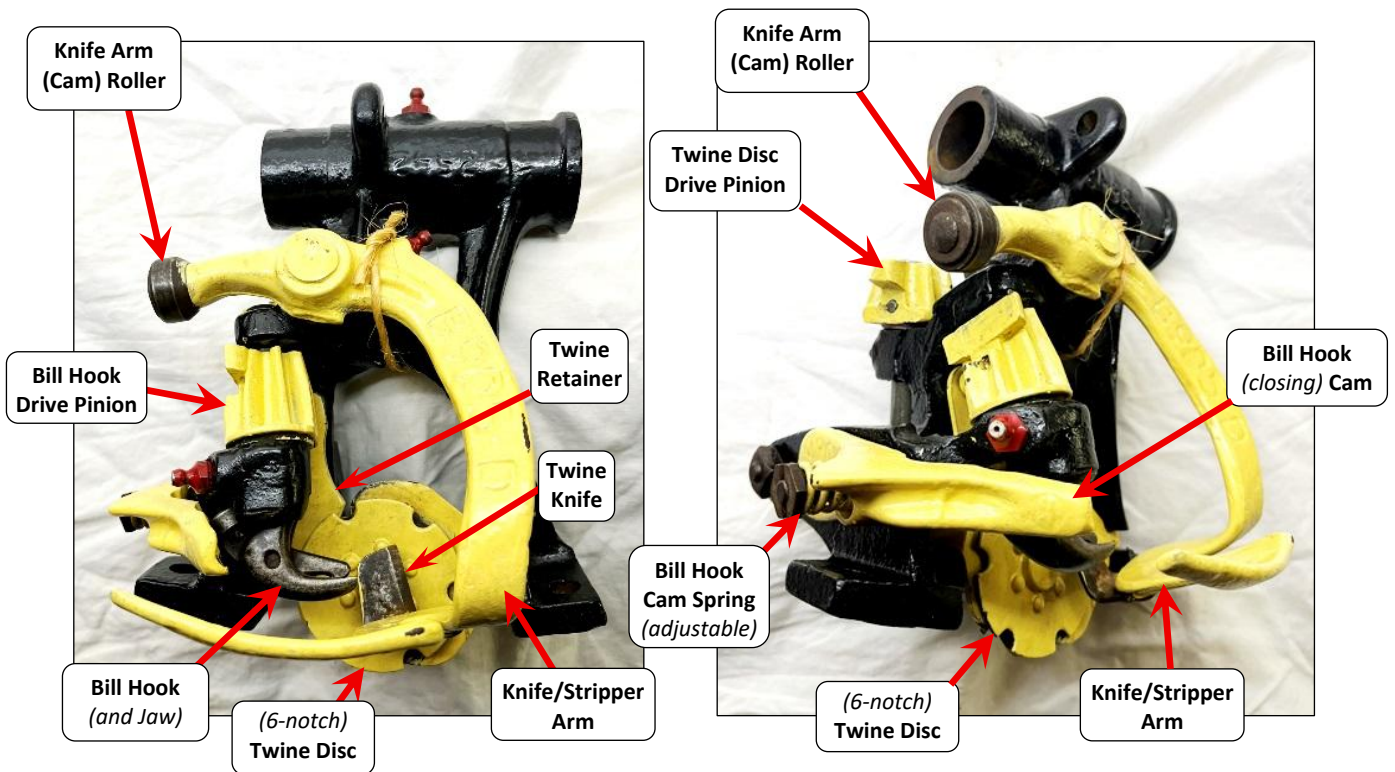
Deering binder knotter – Key components - Viewed from underneath (left) and the (Cam Gear) side (right)
